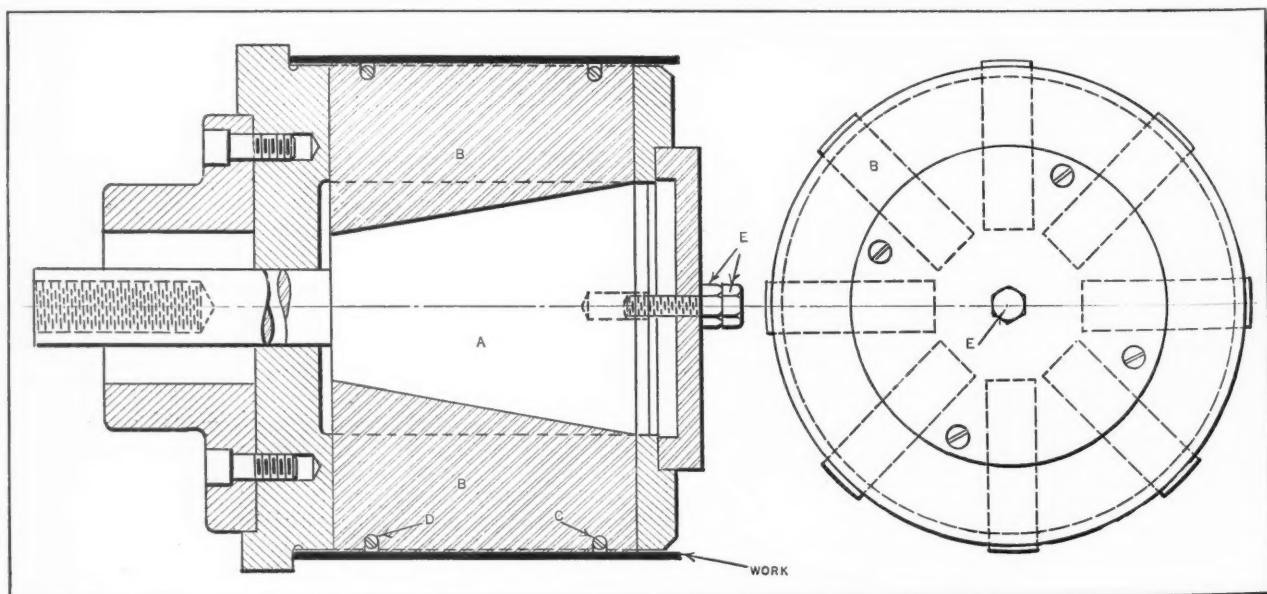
Expanding Mandrel Designed to Hold a Pressed-steel Cup
